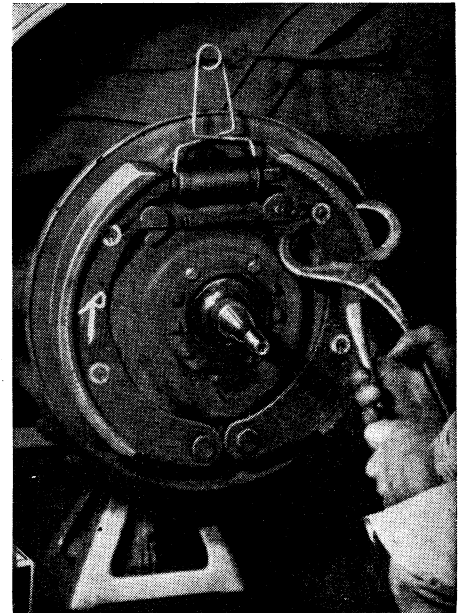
When removing shoes from Bendix and Lockheed brakes, use piston clamp shown to hold pistons in cylinders. The use of the return spring removing and installing pliers are also illustrated
